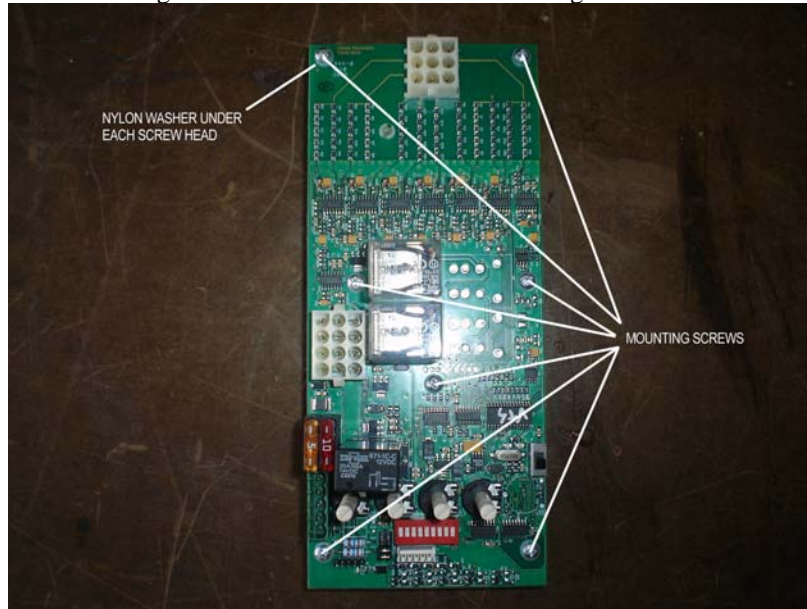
CONTROL BOARD MOUNTING SCREW LOCATIONS
